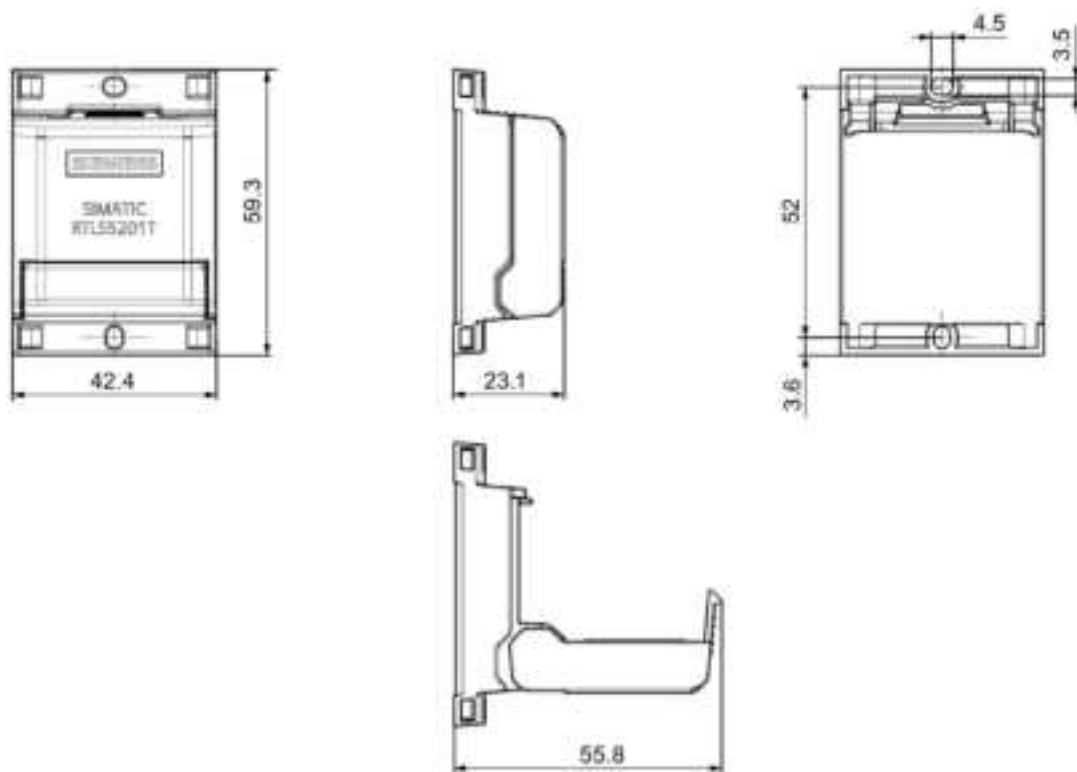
Dimension drawing SIMATIC RTL5201T - All dimensions are specified in millimeters
